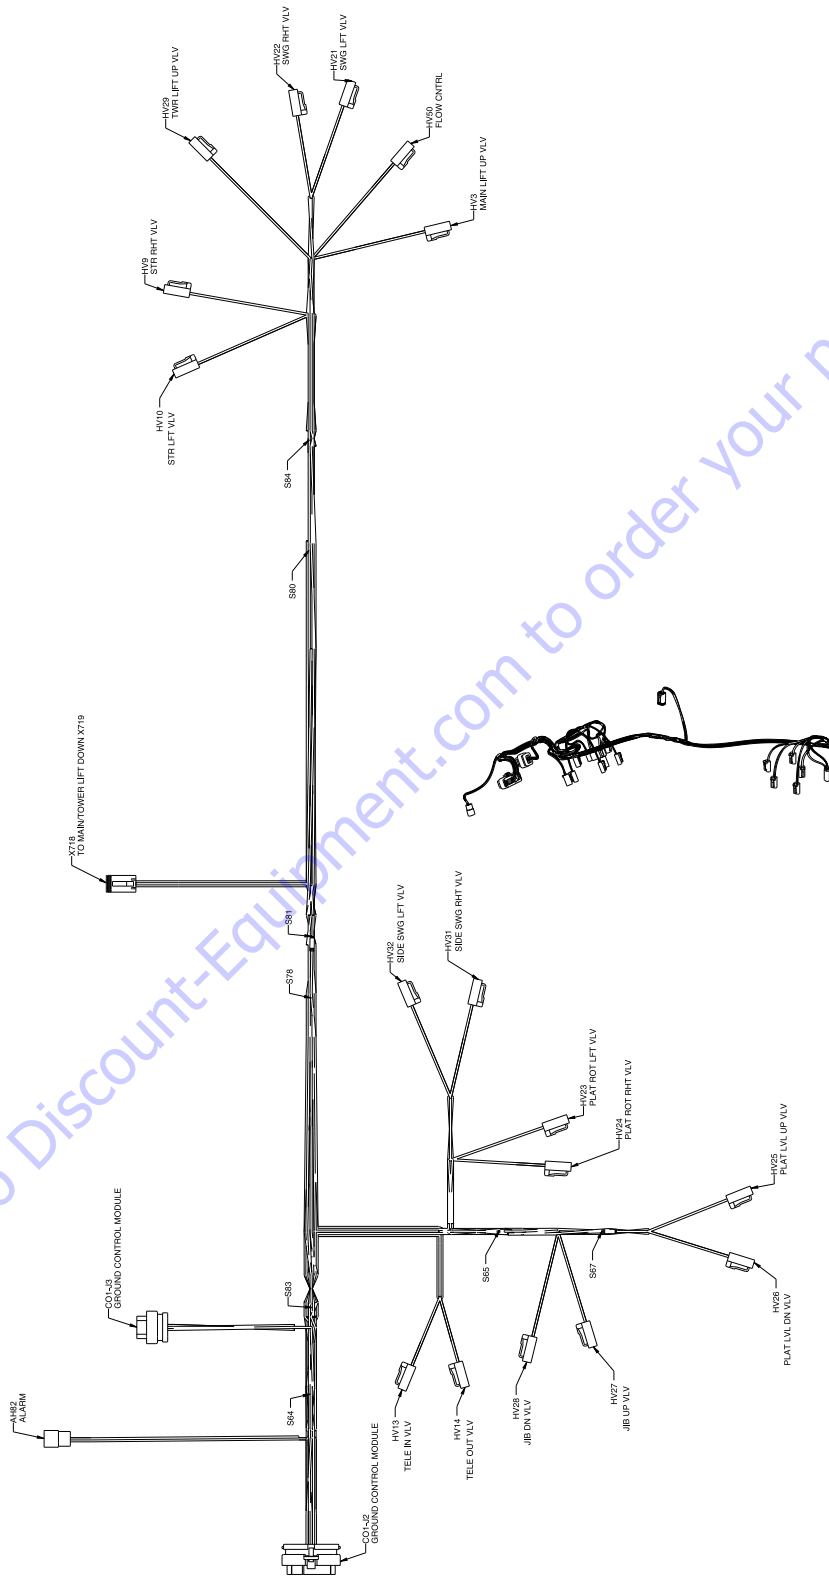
Main Valve Harness - Sheet 1 of 3
